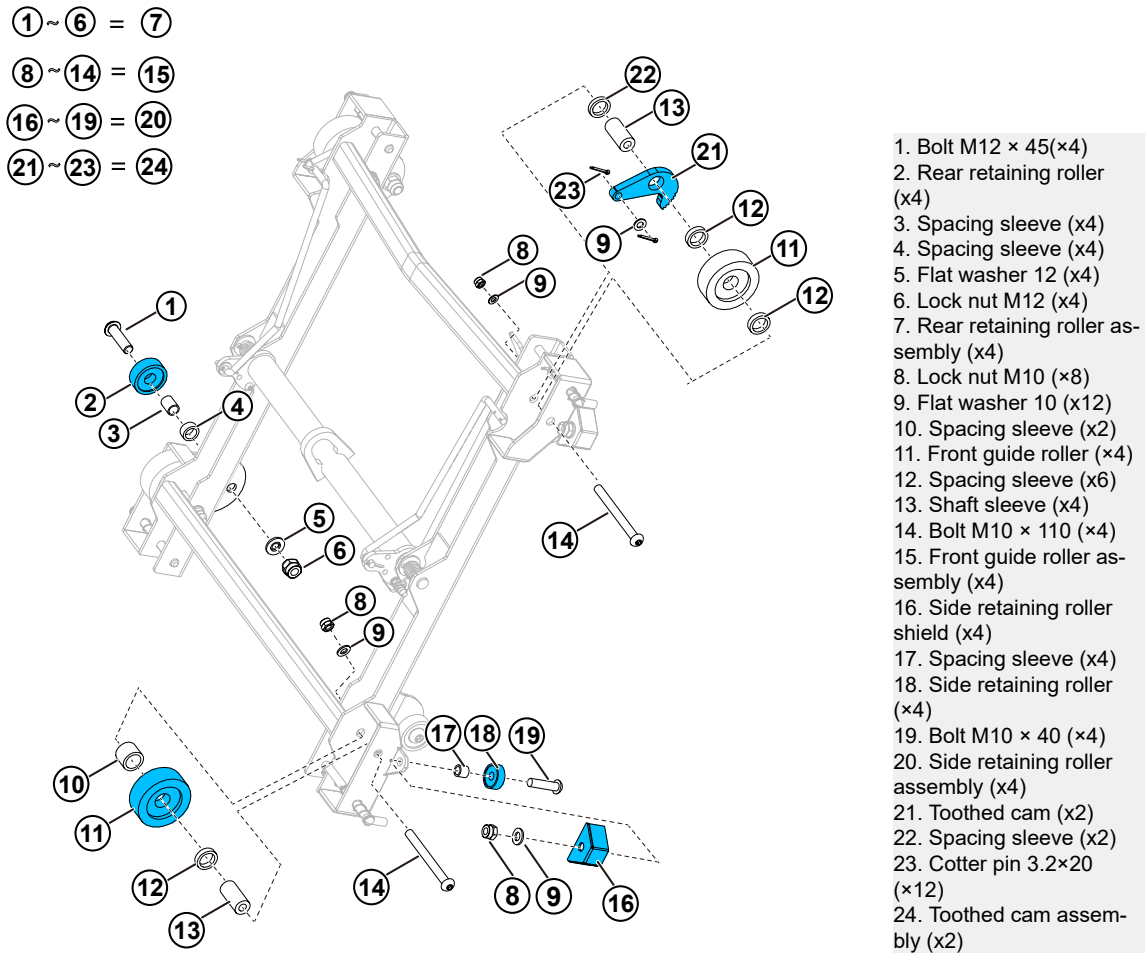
Inspecting Guide Rollers (Side Retaining Roller as Example)
